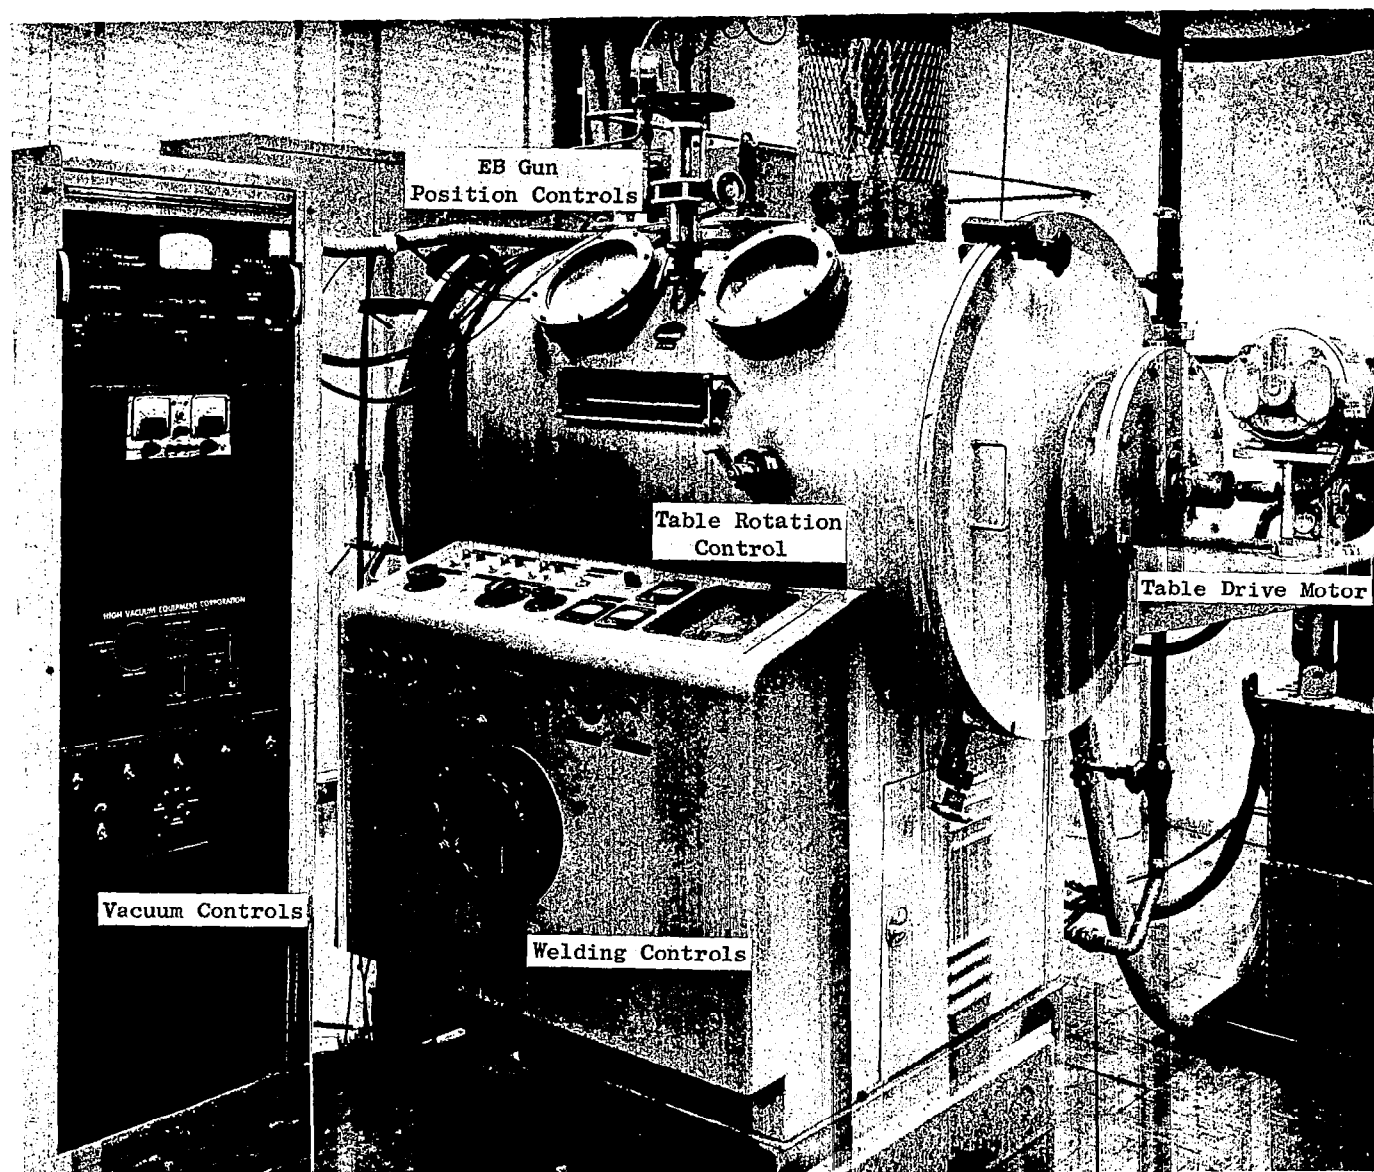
30KV Electron Beam Welding Chamber and Controls Used to Fill Corrosion Capsules with Potassium.
